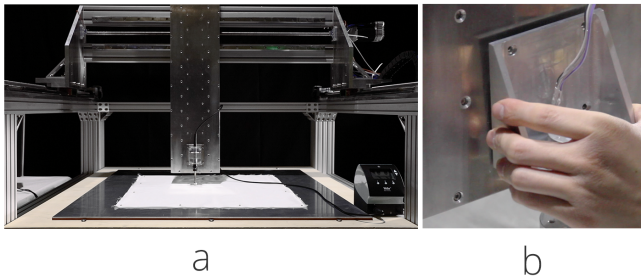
Our custom CNC router (a) has a modular design for tool head changes (b).
